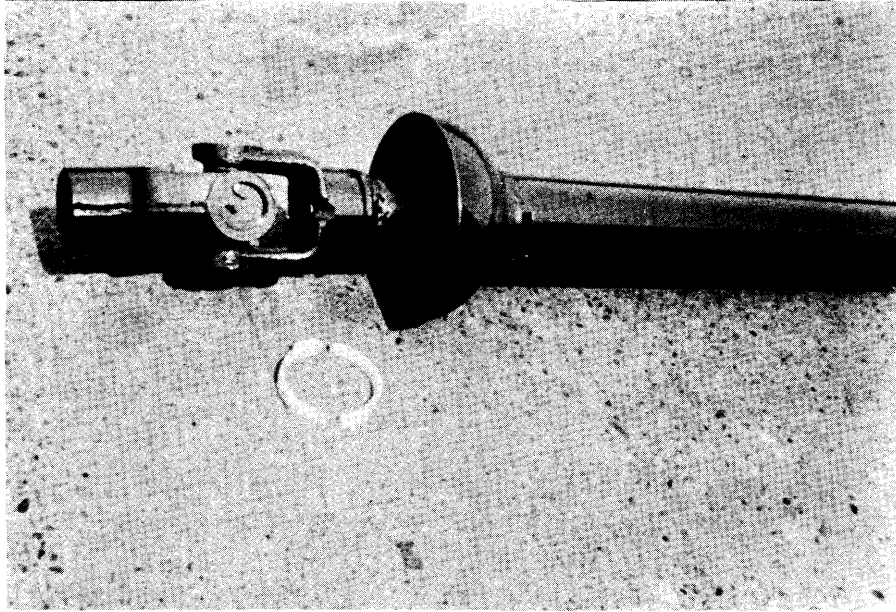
Integral mounted shield disassembled to show nylon bearing.
